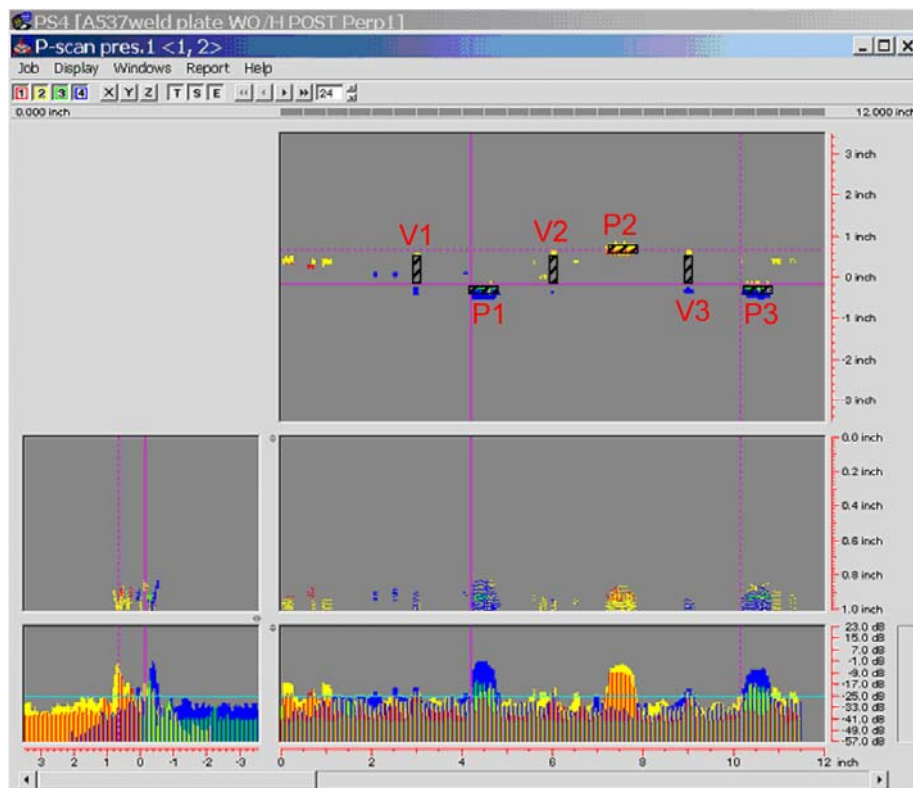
P-scan for stress corrosion cracking parallel to the weld for the as-welded plate.
